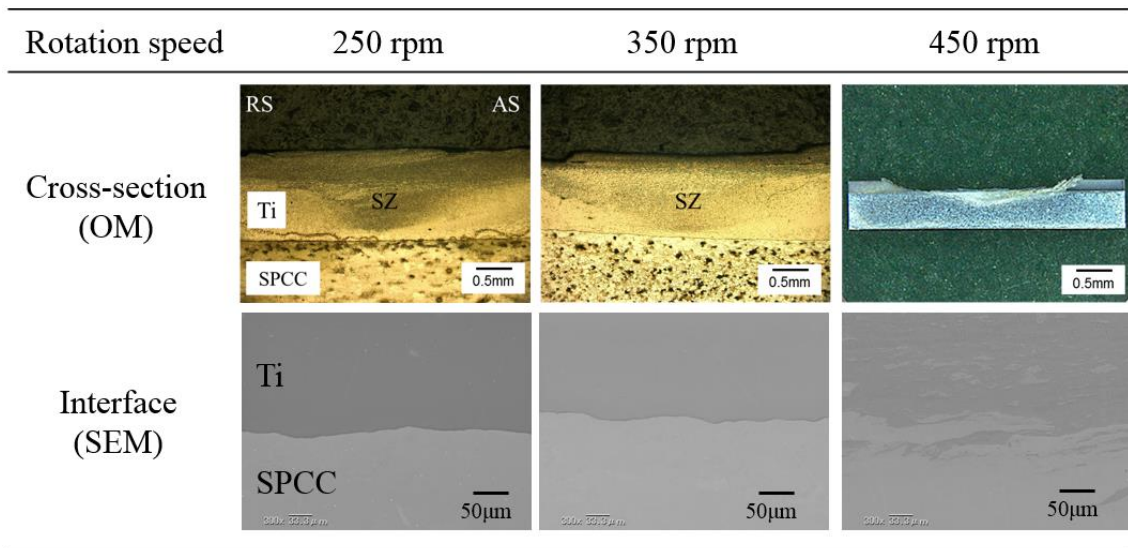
Cross-sections and interfaces of the joints with different rotation speeds of 250, 350 and 450 rpm at constant welding parameters of 100 mm/min and load 9.8 kN.
